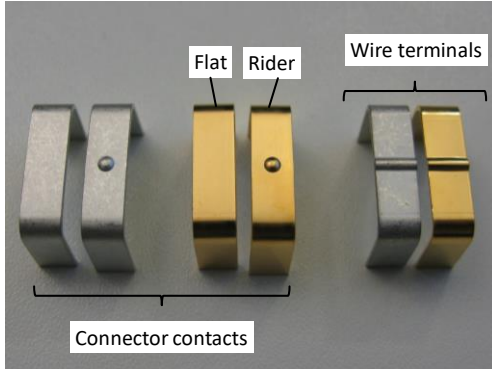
Photograph of gold- and tin-coated contact geometries. The spherical radius of the connector contacts is 1.5 mm, the contact radius of the wire contact is 1.0 mm. The base material is Cu-HCP.
